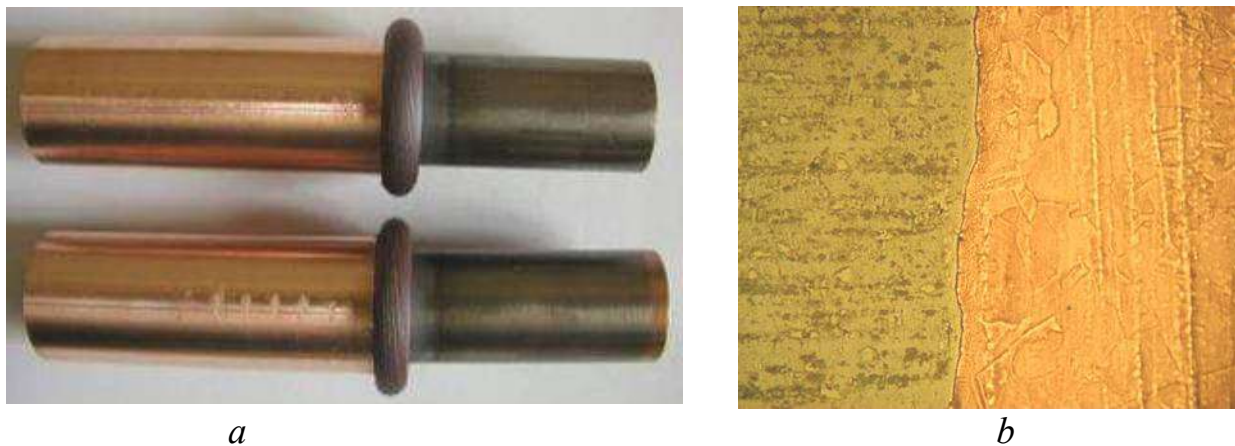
FW composite joints of copper M1 + W-Cu-Ni pseudoalloy for electro-technical industry: welded samples (a), and microstructure of the joint zone (b)
